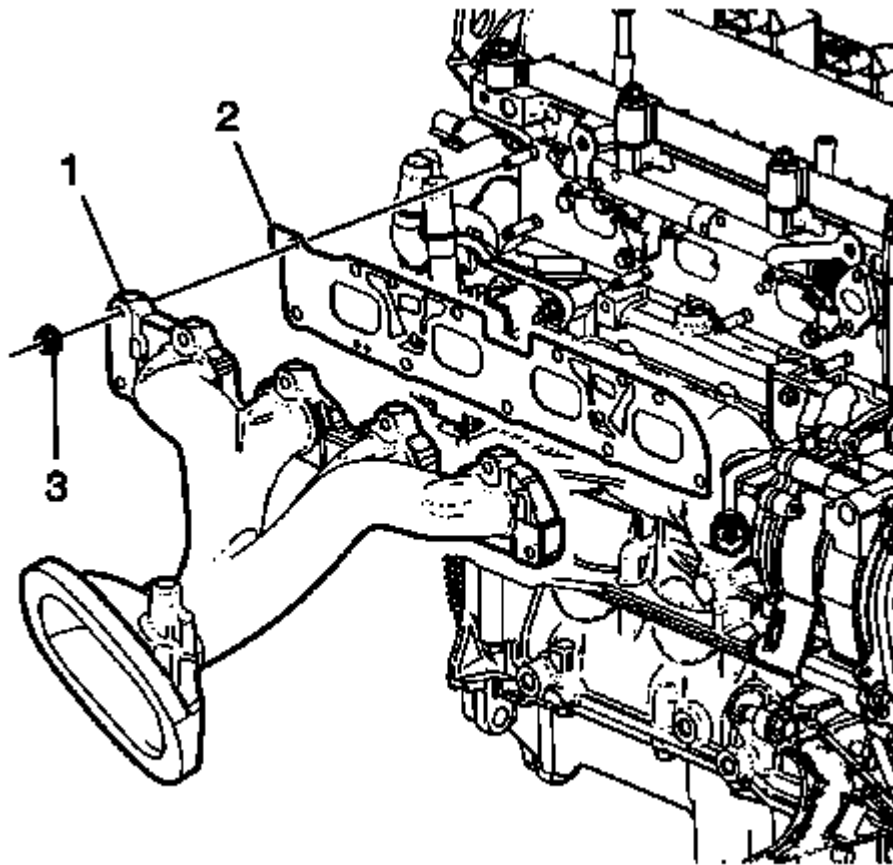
View of Exhaust Manifold to Cylinder Head Retaining Nuts
